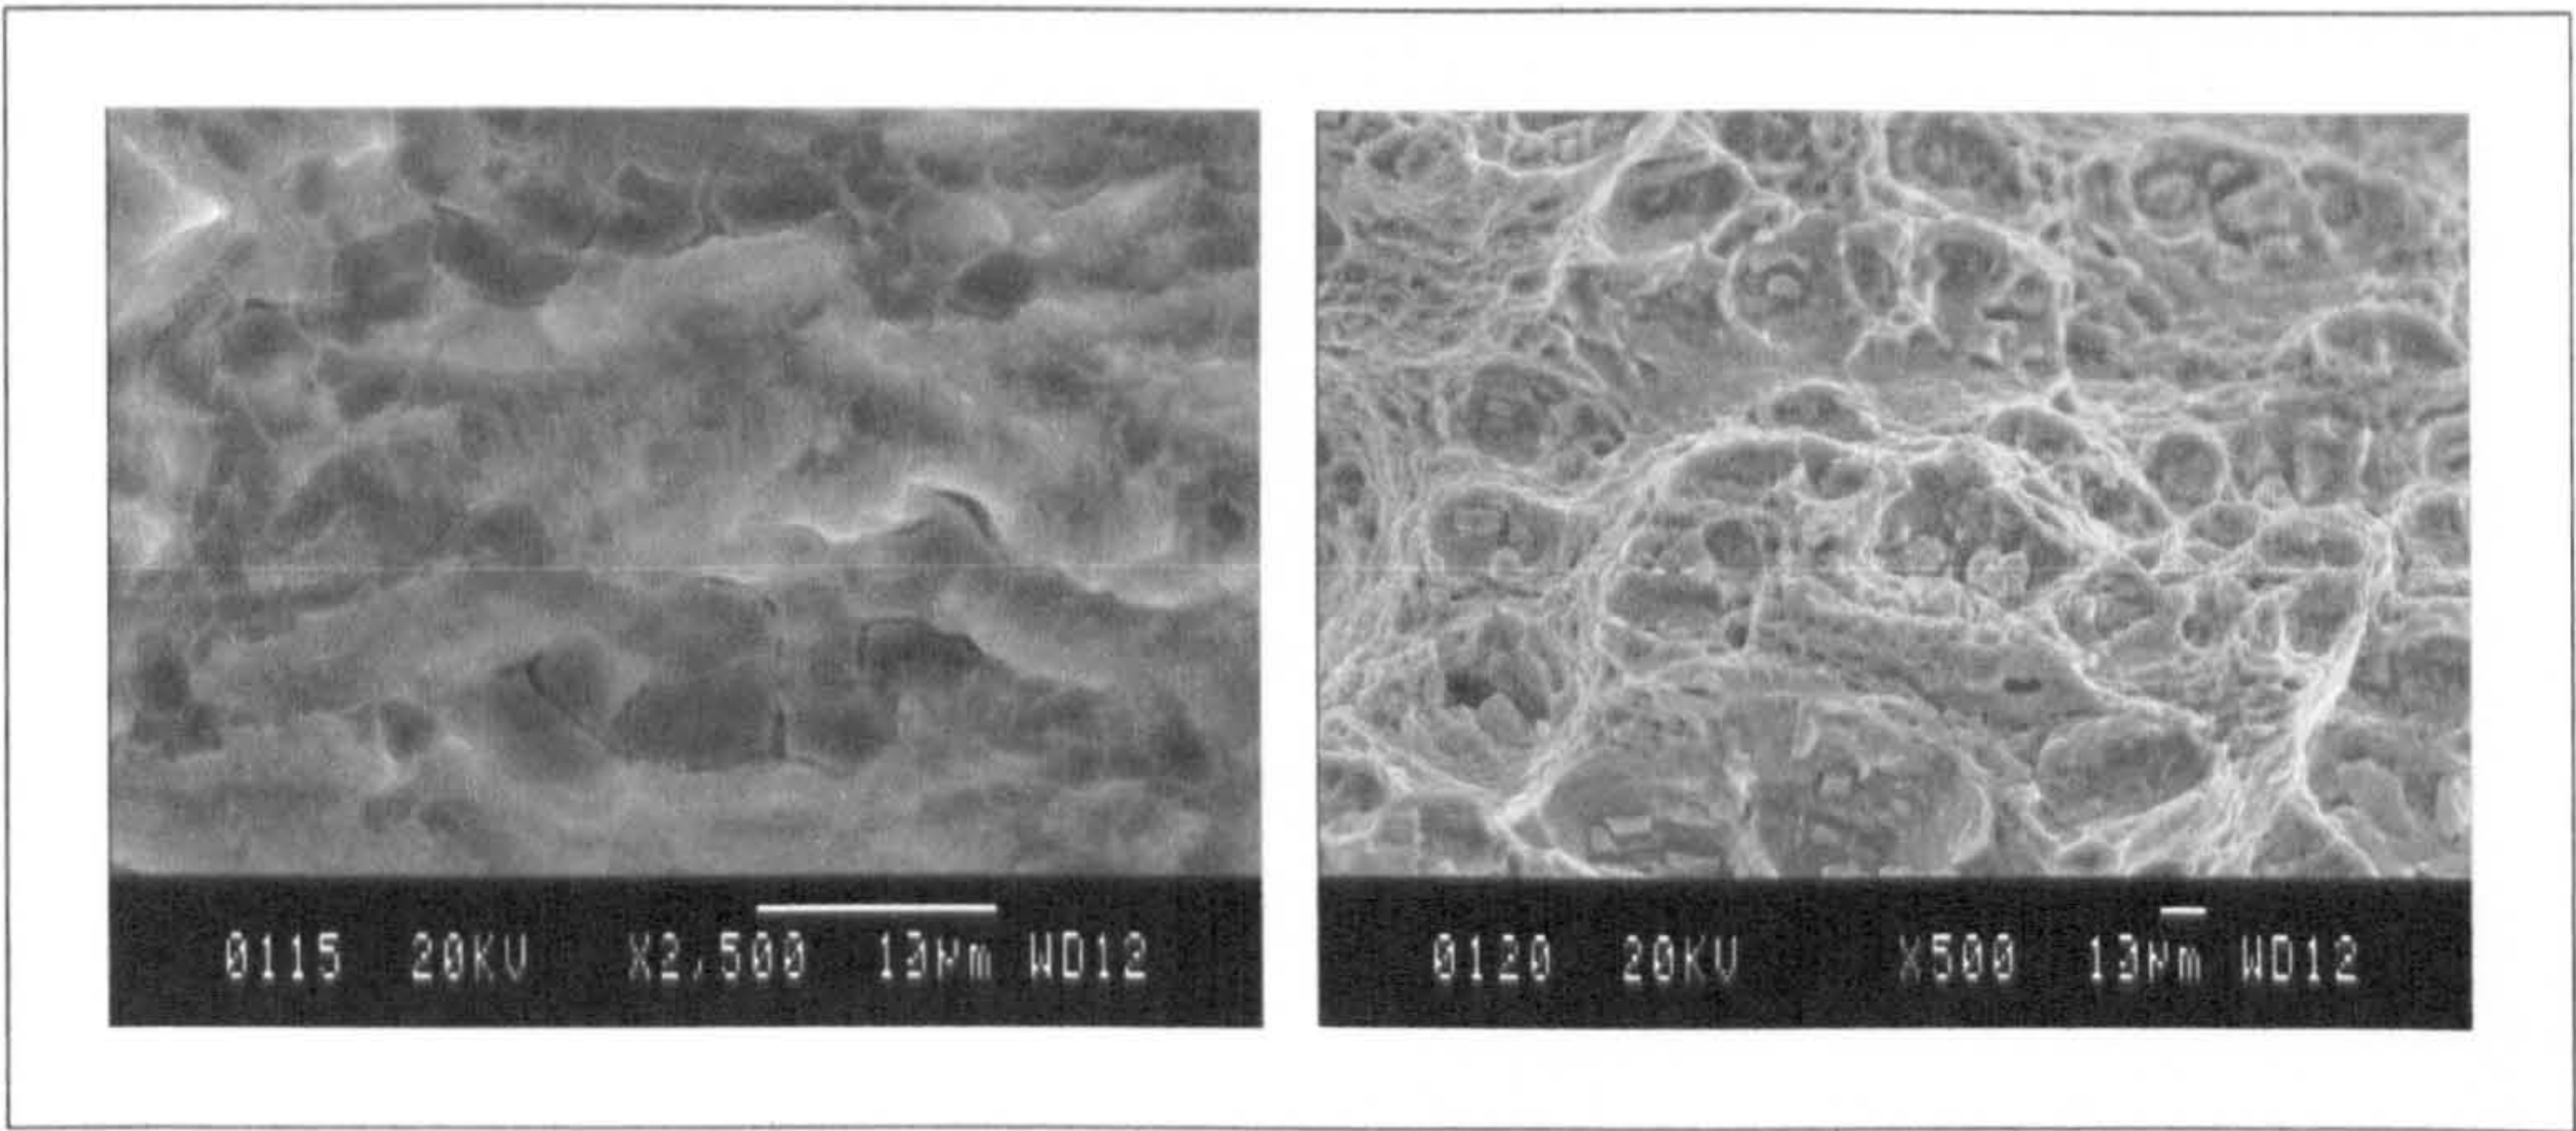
Fatigue fracture surface within the HAZ containing intermetallics (left), intermetallics and microvoid coalescence observed on the fast fracture surface within the HAZ (right), (FS DP 6).
